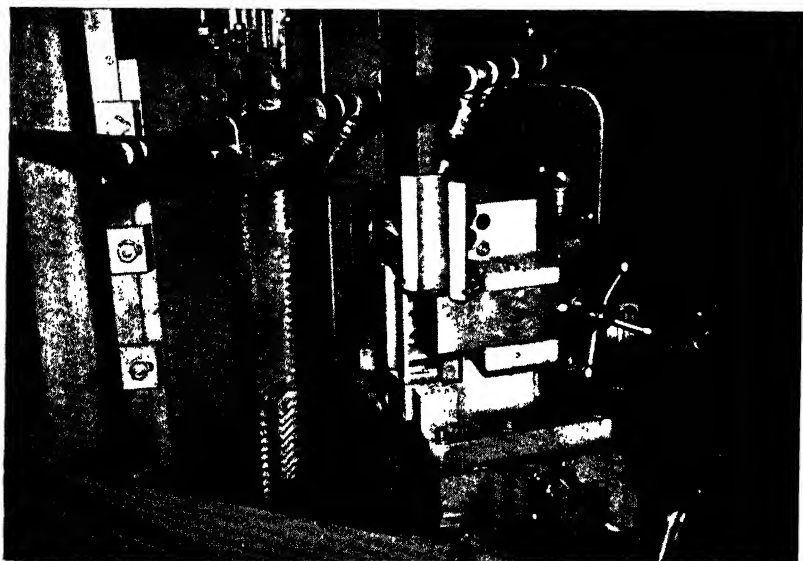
Other Broaching Tools and Fixtures for Gear Shifter Shoes
